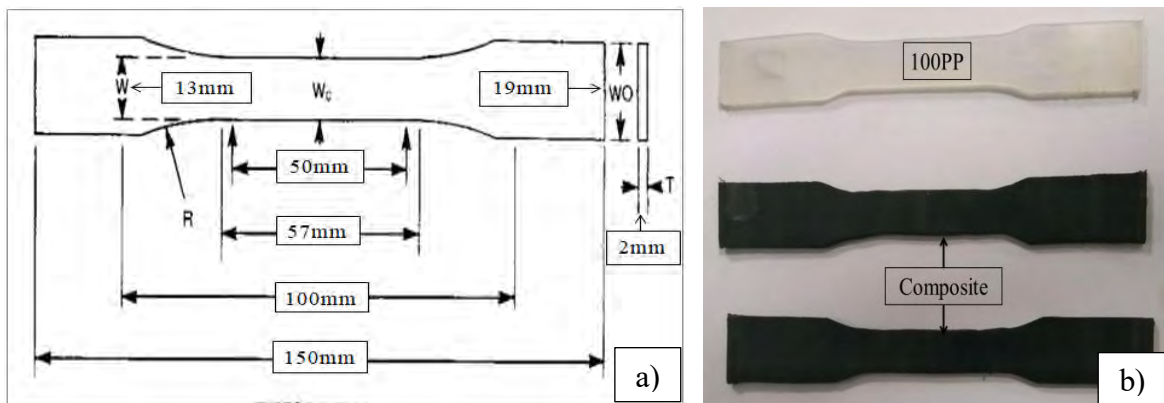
Tensile test specimens a) specimen measurements, b) prepared specimens
